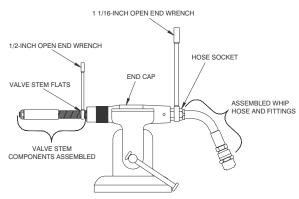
Thread the Hose Socket from the Valve Stem.
